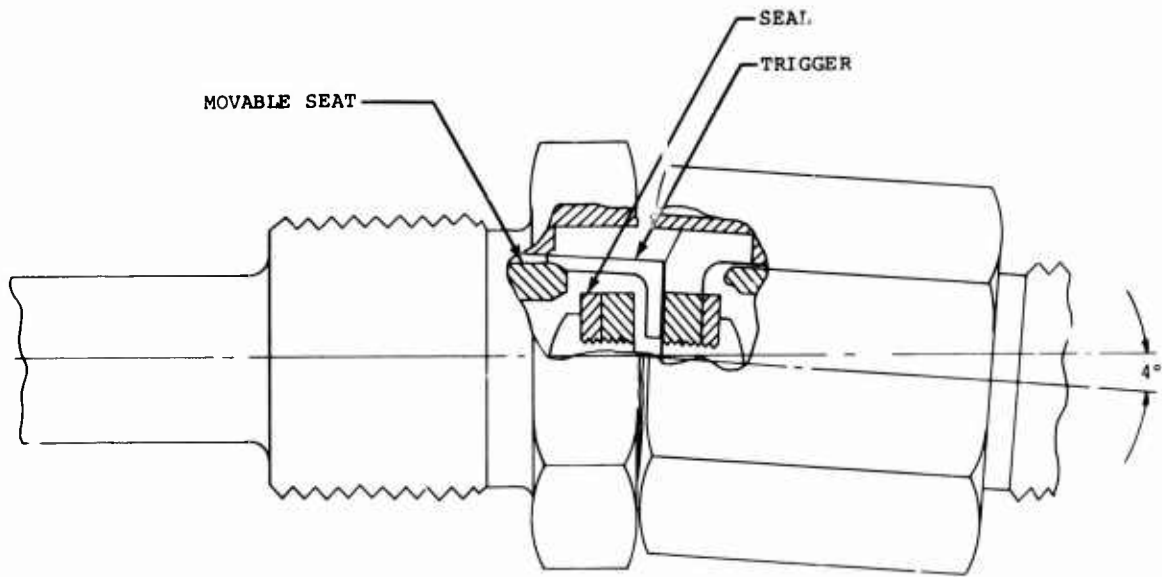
Valve 4 Separation. (Valve Body Fractured But Seat Remains in Open Position With Trigger End Still Trapped by Valve Body.)
